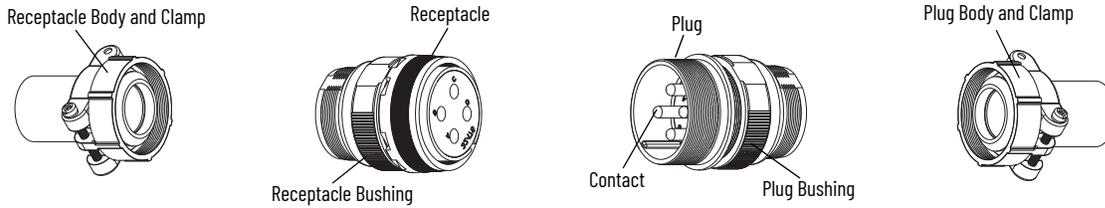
Military-style Power/Brake Connector (standard) Cable Examples
